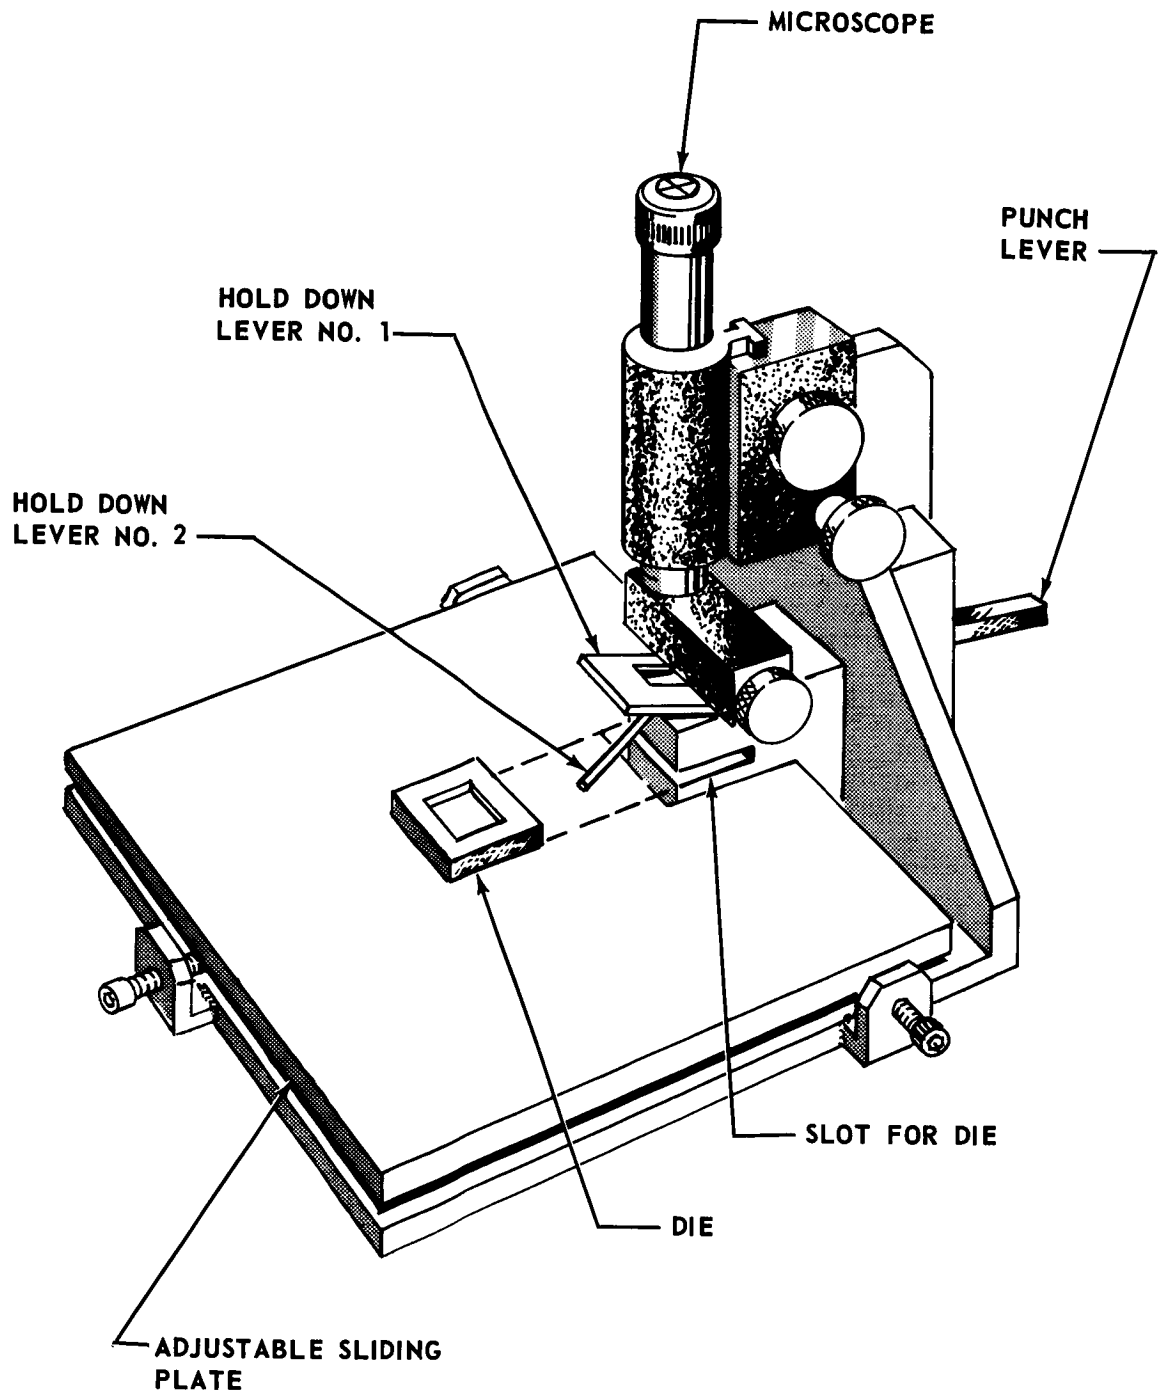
PERSPECTIVE VIEW OF MICROSCOPE, ALIGNMENT MECHANISM, AND DIE
